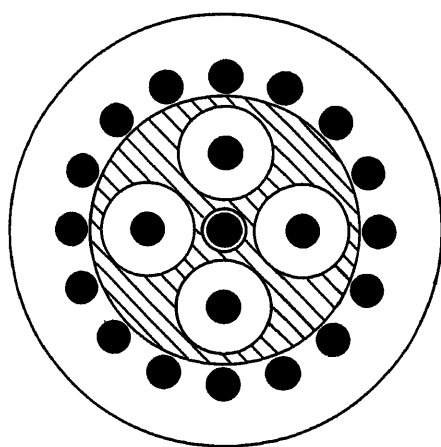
Cross-sectional view of new spiral-4 cable and details of construction
